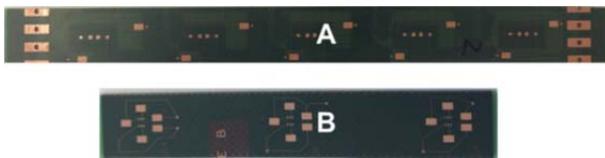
PCB Test Samples Type A 133x12.7 mm and Type B 77x12.7 mm.
